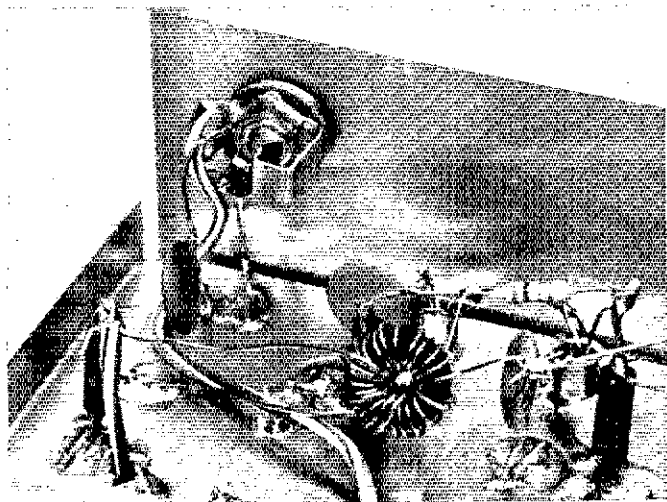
Close-up view of the assembly technique discussed in this article. Components are soldered to the circuit-board material and used as tie points.
